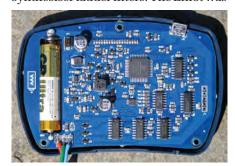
Inside view of DCA75 revealing conventional surface-mount asssembly
